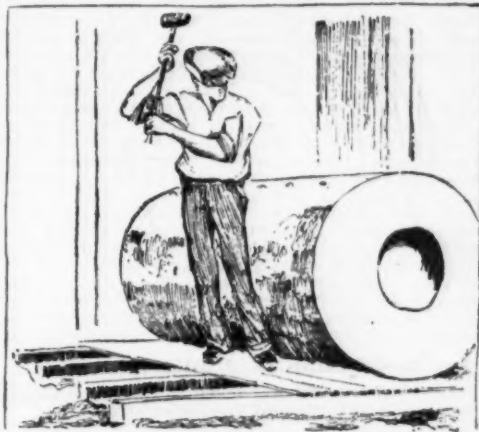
APPEARANCE OF CASTING WHEN TAKEN FROM THE MOULD.
